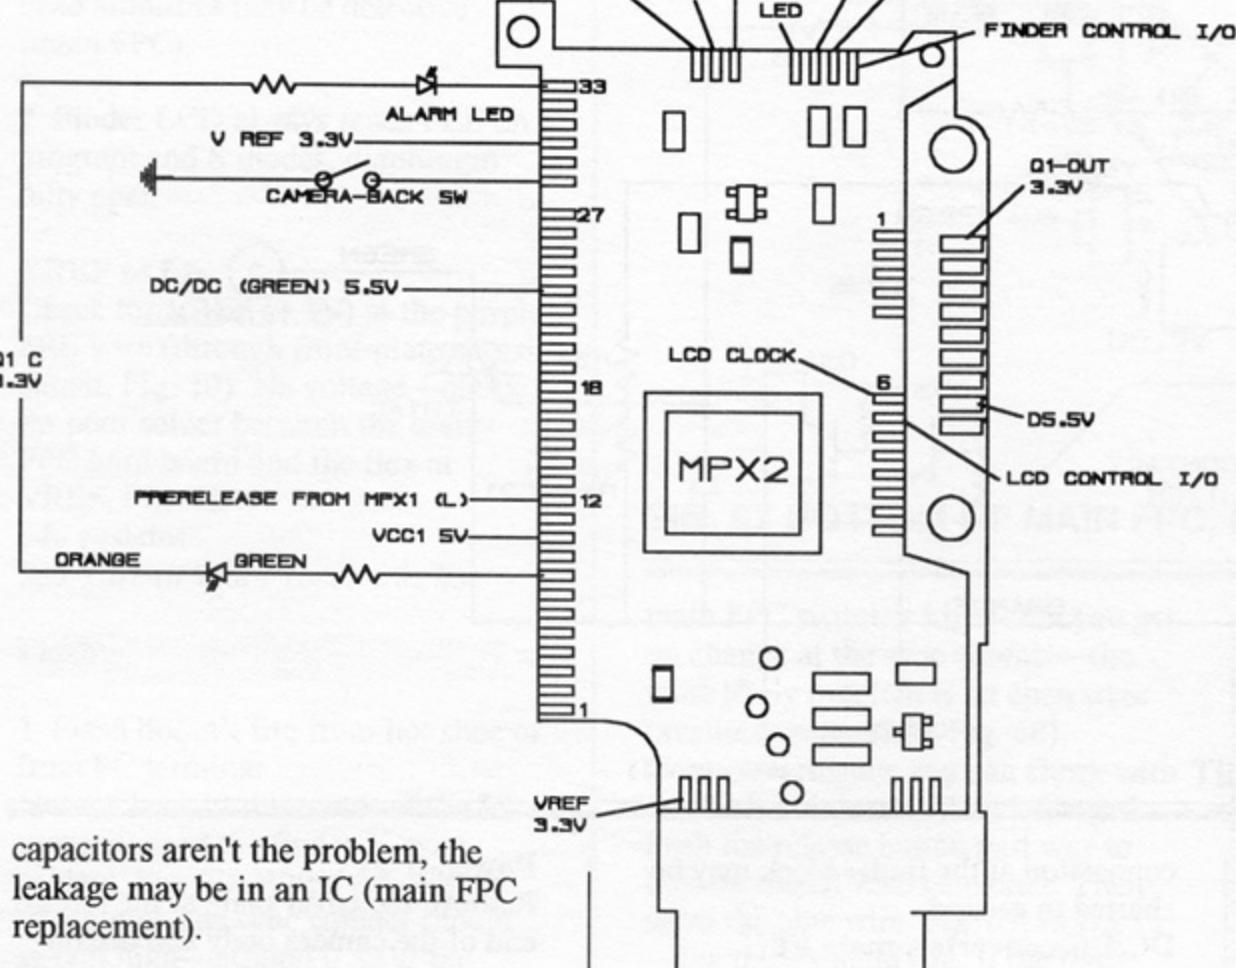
MAIN FPC, FRONT, REWIND SIDE OF LENS
